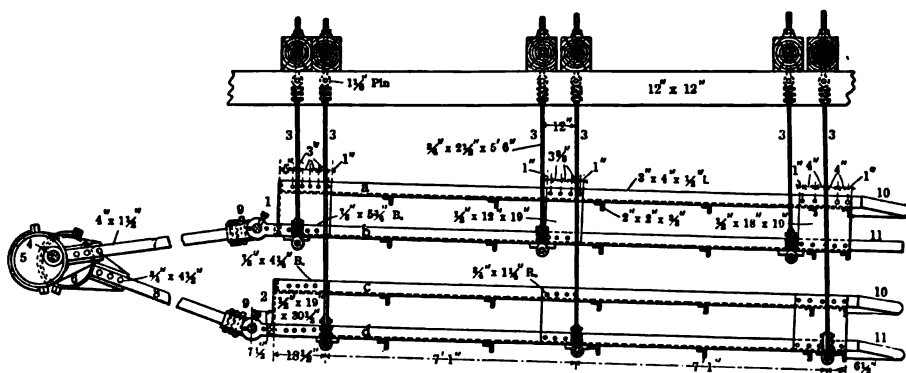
CHRIST SHAKING SCREEN. ELEVATION.
